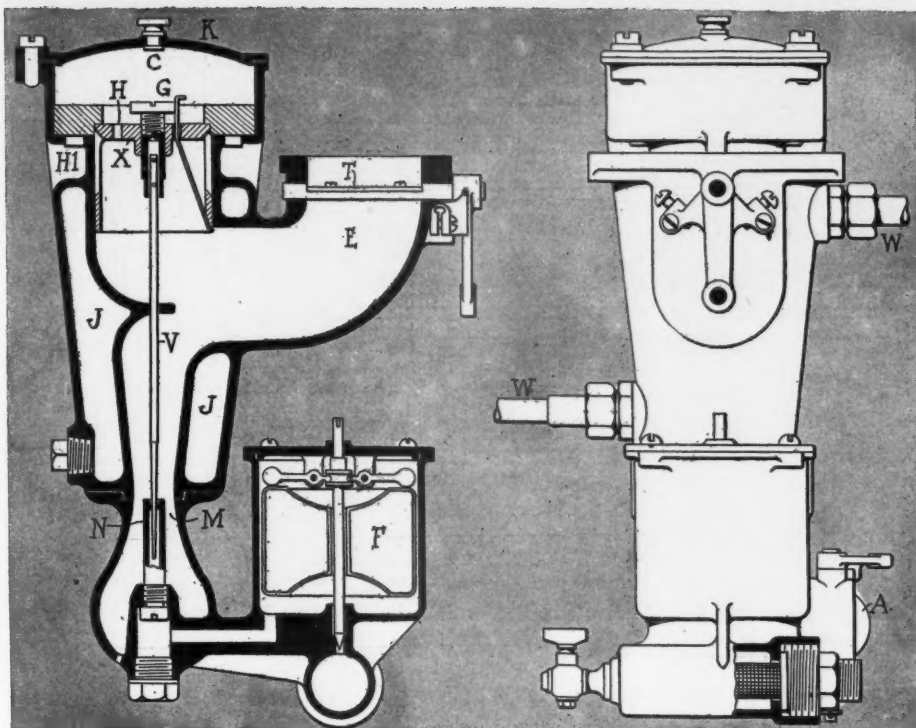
NEW ALCO CARBURETER WITH NEEDLE CONTROL
